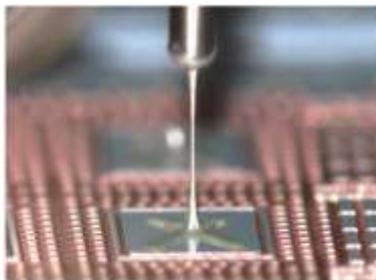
Excessive Epoxy tailing and Epoxy on Leads failure mechanism
